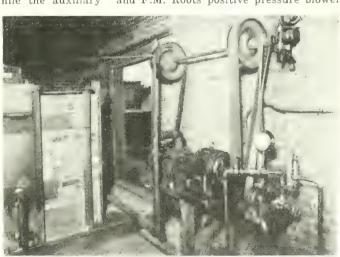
COMPACT ARRANGEMENT OF MOTOR, PRESSURE BLOWER AND OIL FUEL PUMP FOR FURNACE
